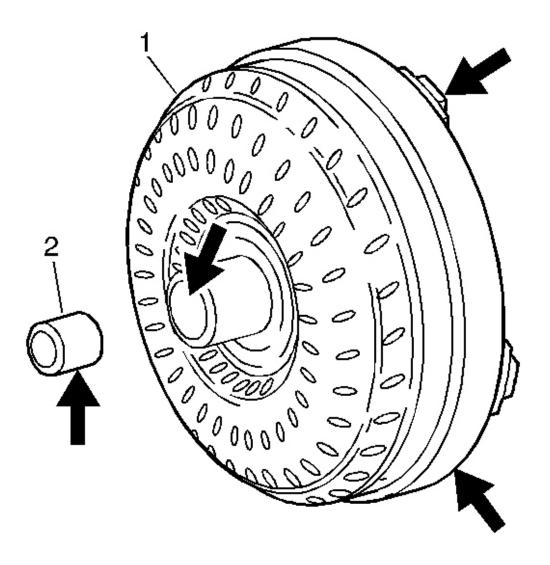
Inspection Areas On Torque Converter Courtesy of GENERAL MOTORS CORP.
